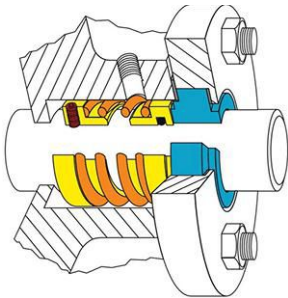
Rotary seal design with the springs exposed to the process fluid
